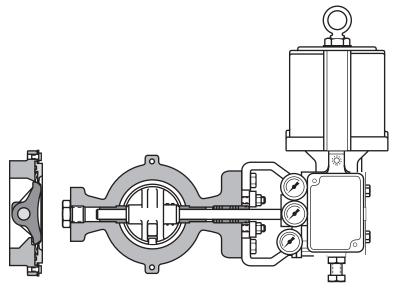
Flangeless butterfly control valve (wafer style). (*Courtesy of Valtek International*)
